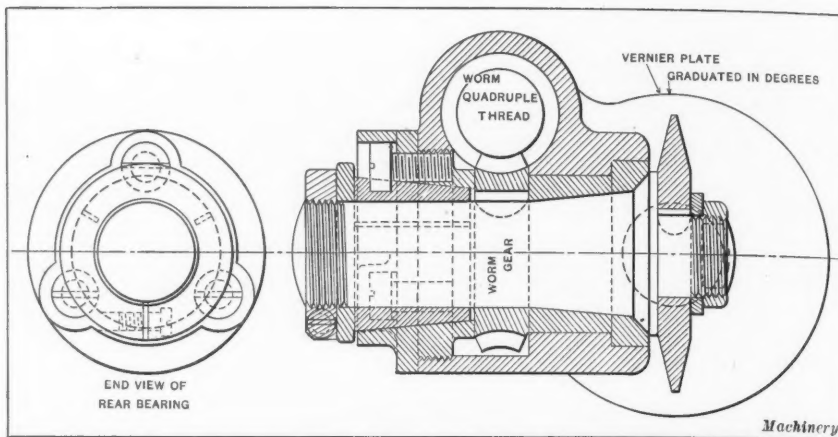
Cross-sectional View showing Design of Cutter-spindle Bearing on Beckett Thread Milling Attachment
